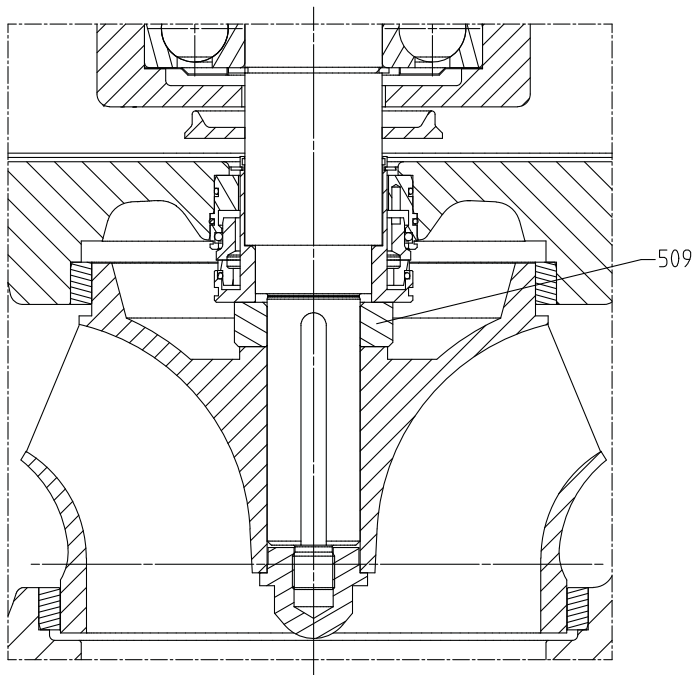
Design with intermediate ring (for sizes 250-250, 250-300, 350-340 only)
